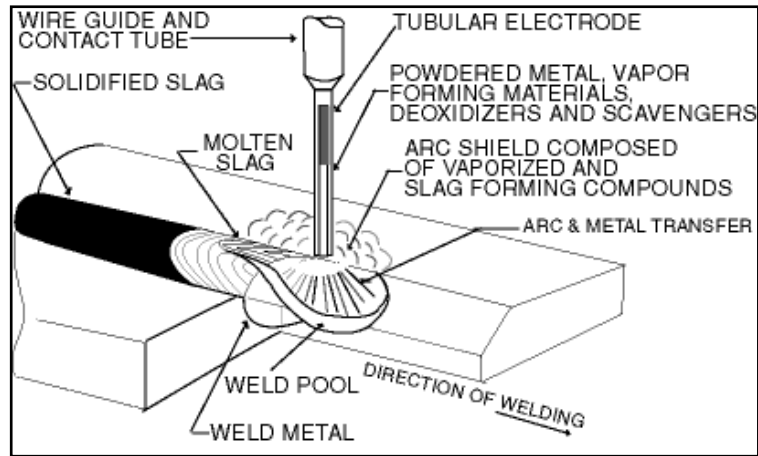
Delivering of electrode wire and shielding gas to weld pool
